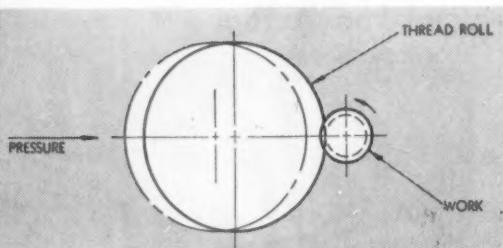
Drawing showing thread rolling in a screw machine using a single roll.
